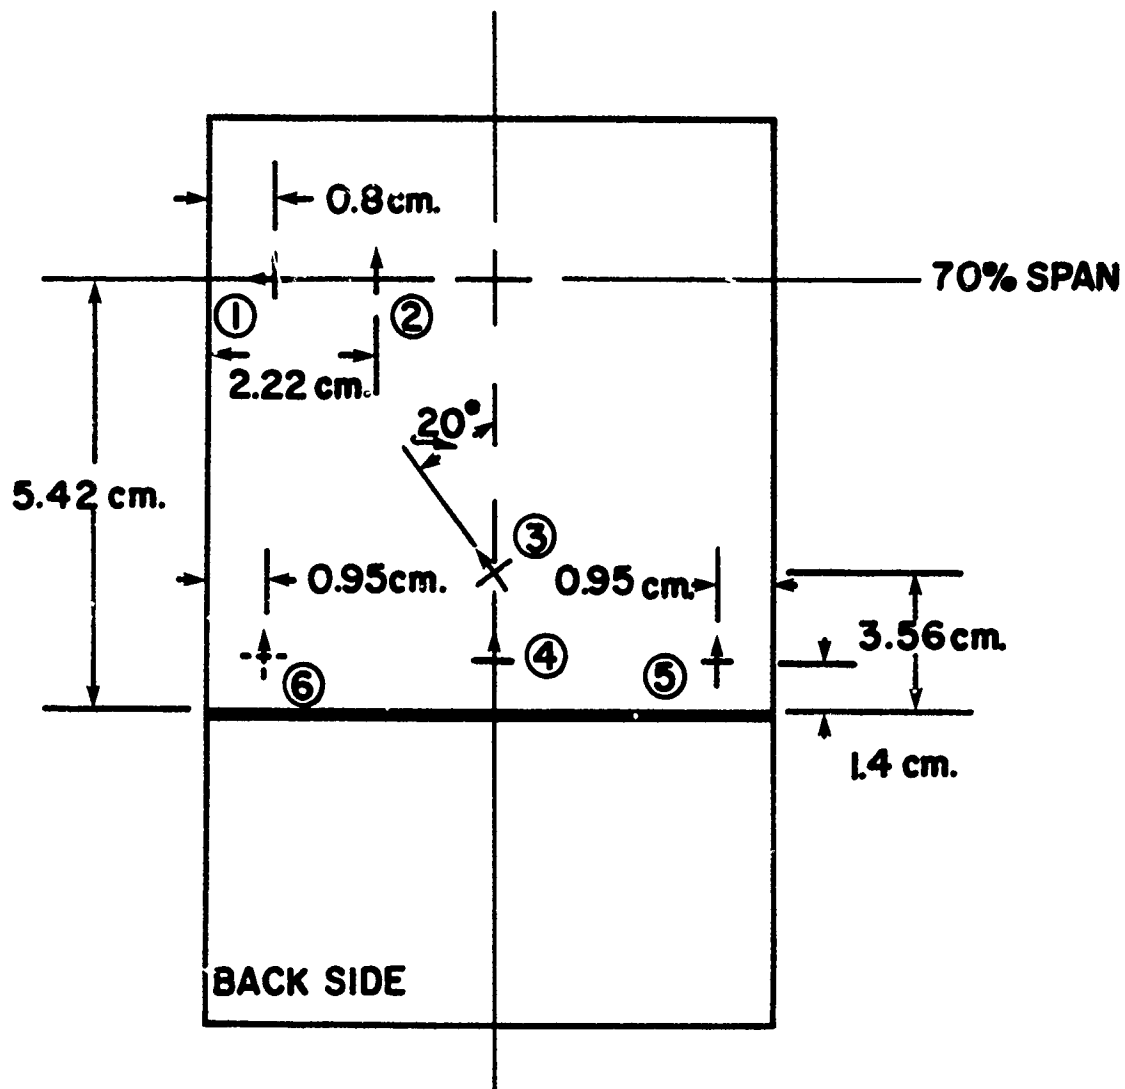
A. Strain Gage Locations for Group 15 Structural Element Test Specimens.
